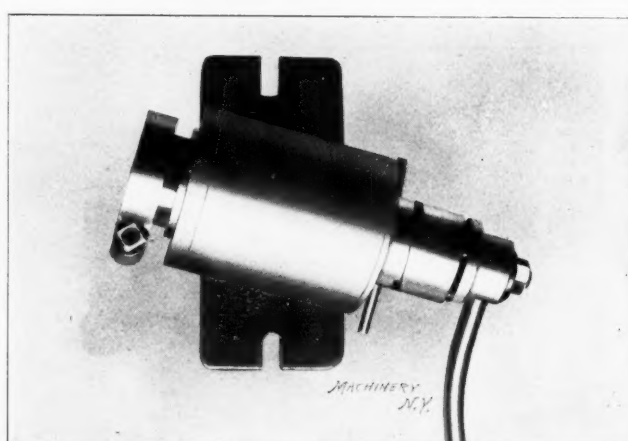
Fixture for Holding Three-tooth Claw-clutches when Milling the Teeth
